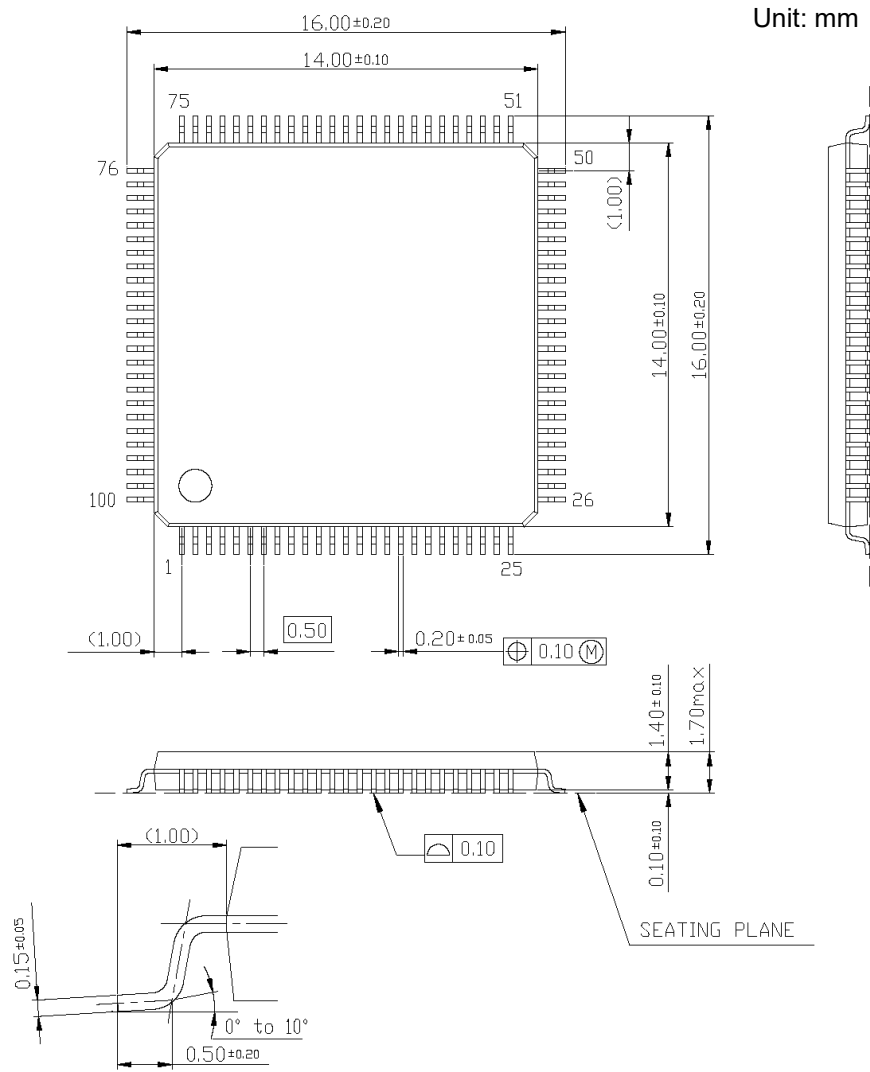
Package Dimension of 100 pins 14mm * 14mm 0.5mm pitch
